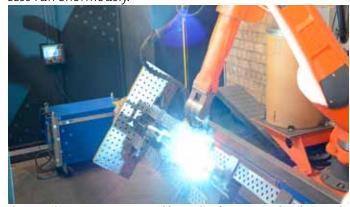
The QIRX QRC-350-E welding robot has 7 axes, thereby greatly simplifying welding of components.
